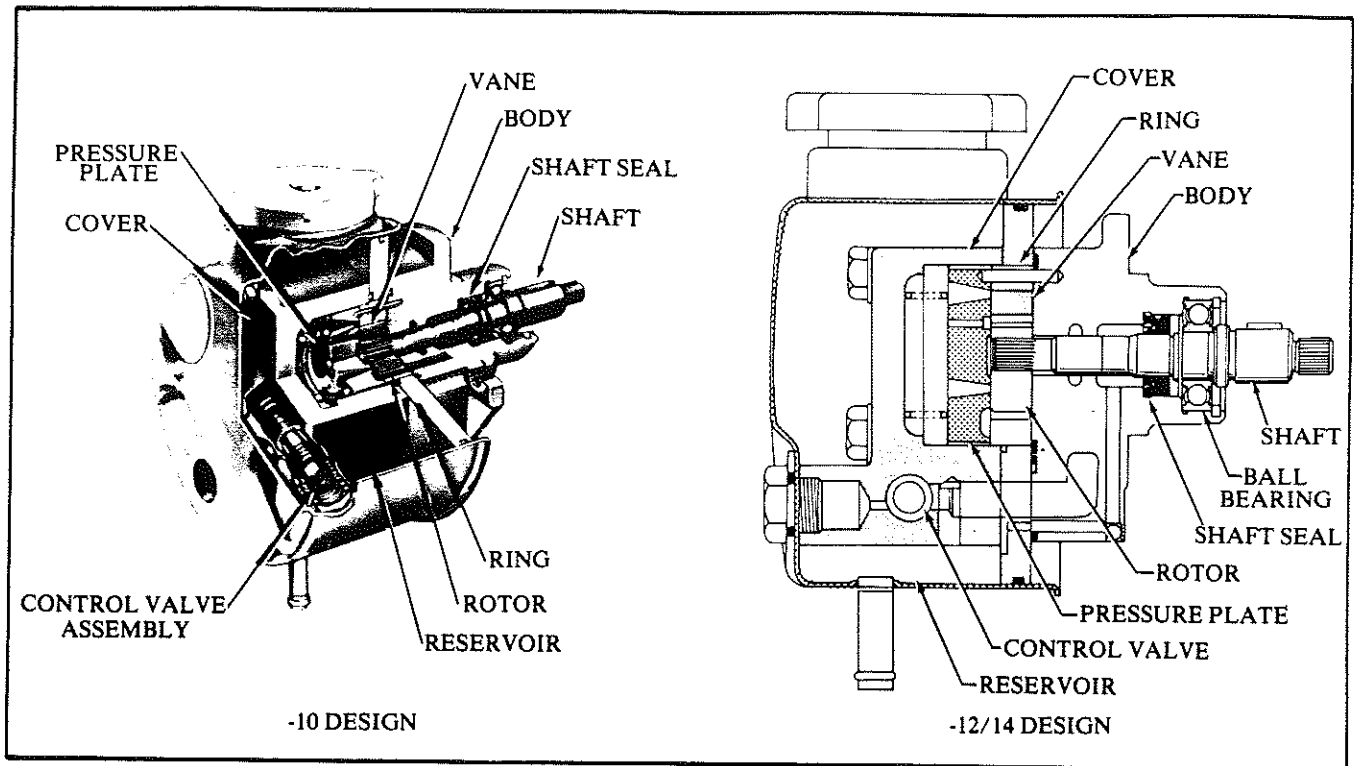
VTM41 Pump - Cutaway and Sectional Views
